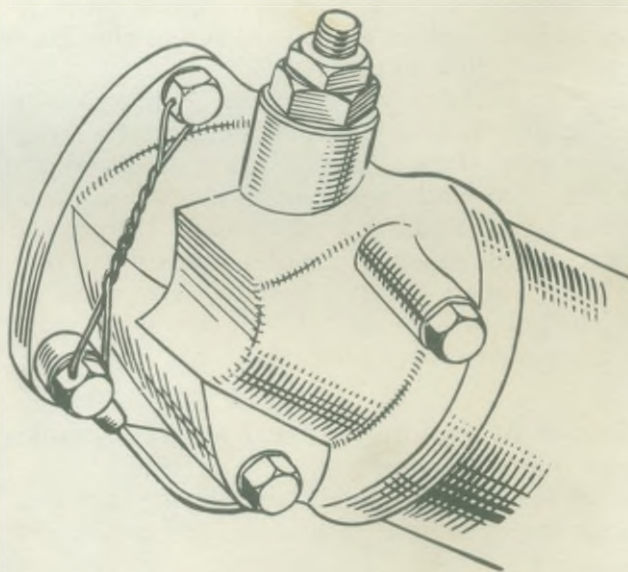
Showing correct method of wiring filter bracket holding bolts. (Engines up to V179369 and TDC1567.)
